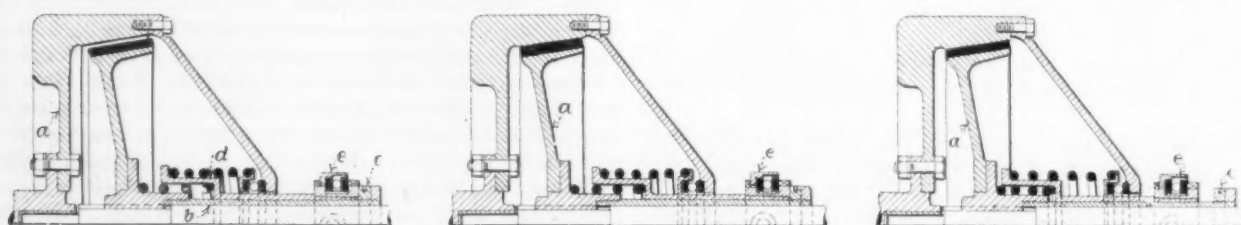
THREE POSITIONS, DISENGAGED, PARTLY ENGAGED, AND FULLY ENGAGED, OF A DOUBLE-SPRING CLUTCH
